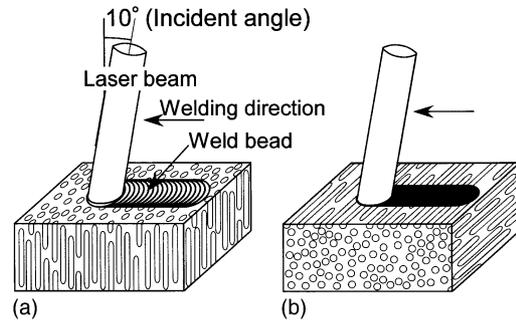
Schematic views of specimens during laser welding in the porous copper with the pore growth (a) perpendicular and (b) parallel to the work piece surface.
